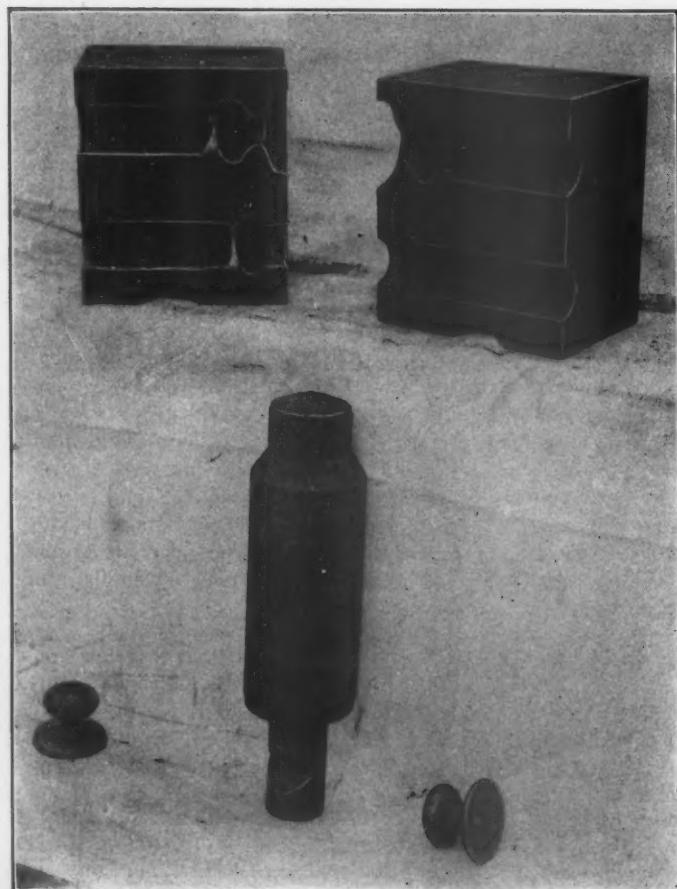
DIES AND FORMER FOR BAGGAGE CAR DOOR KNOB.
